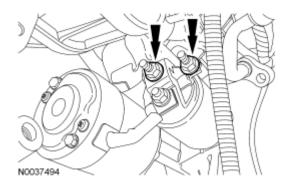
Locating Starter Wire Nuts Courtesy of FORD MOTOR CO.
